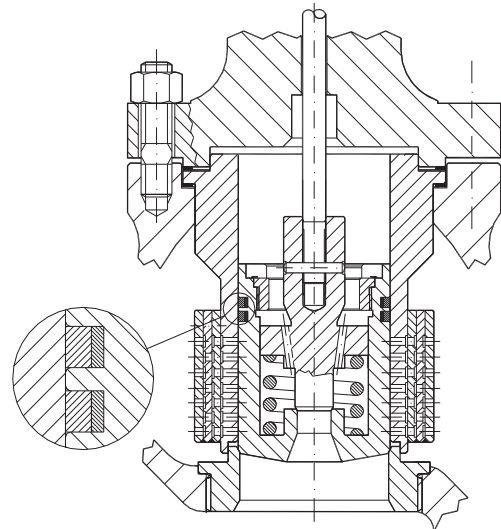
Threaded seat - Balanced trim with Pilot plug
